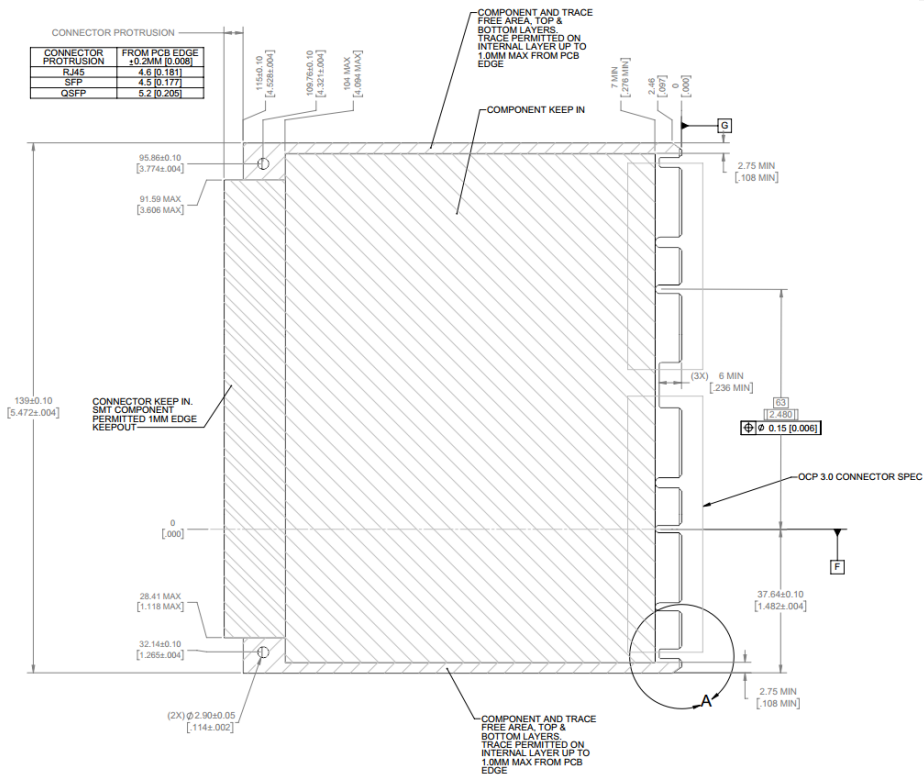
Large Form Factor Keep Out Zone – Bottom View
